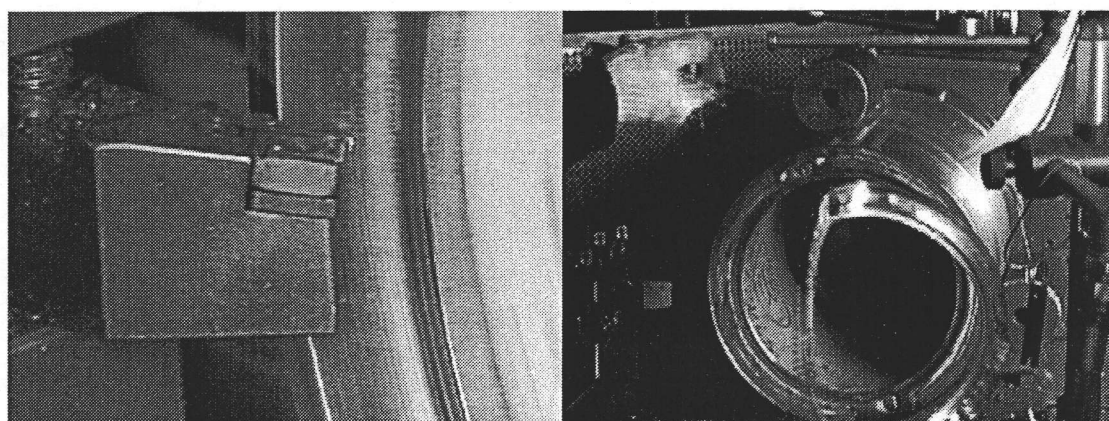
Lids and inner capsule are removed with a diamond tool.
